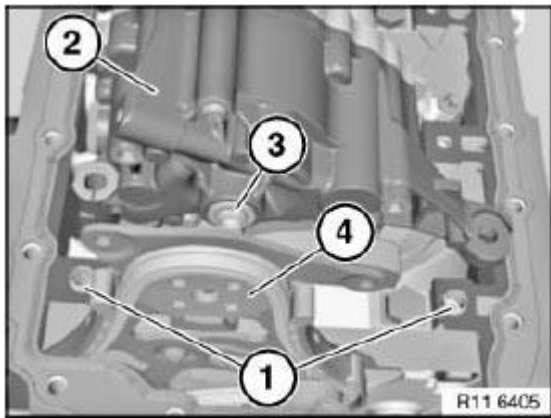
Identifying Spacers, Twin Surface And Oil Pump
